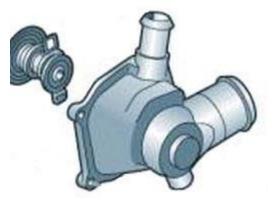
Coolant thermostat housing for map-controlled engine cooling.
